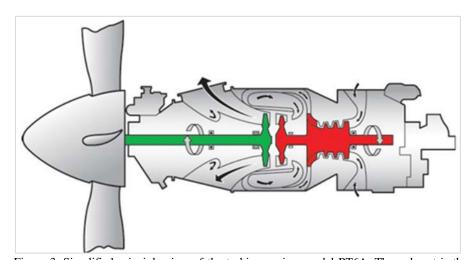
Simplified principle view of the turbine engine, model PT6A. The red part is the compressor turbine and compressor. The green part is the power turbine and the power turbine shaft. Image: Pratt & Whitney Canada Corp.
